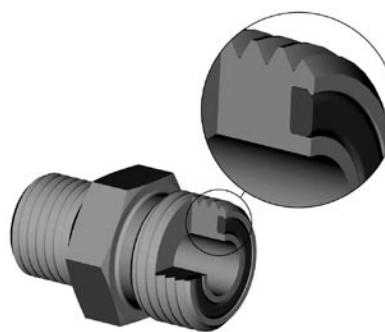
Captive O-ring Groove (CORG) Cutaway
